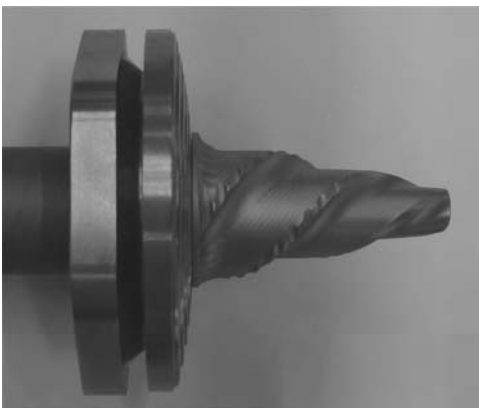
Friction stir welding tool with convex scrolled shoulder of Densimet and MX Triflute probe of Nimonic 105. Source: Ref 34
